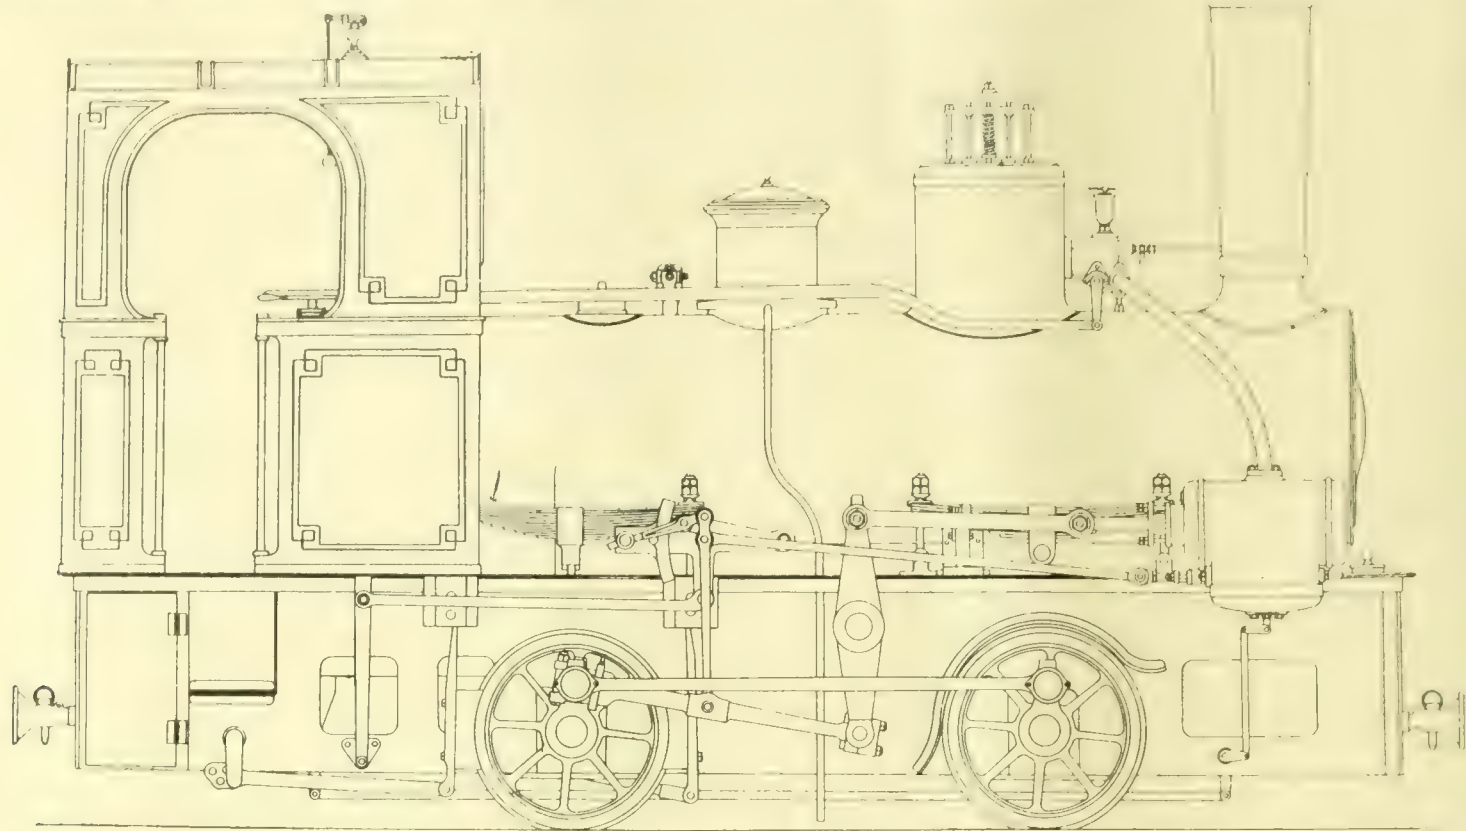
OUTSIDE TWO-CYLINDER LOCOMOTIVE WITH BALANCED ROCKING BEAM. Requires a minimum amount of Balance Weight.
